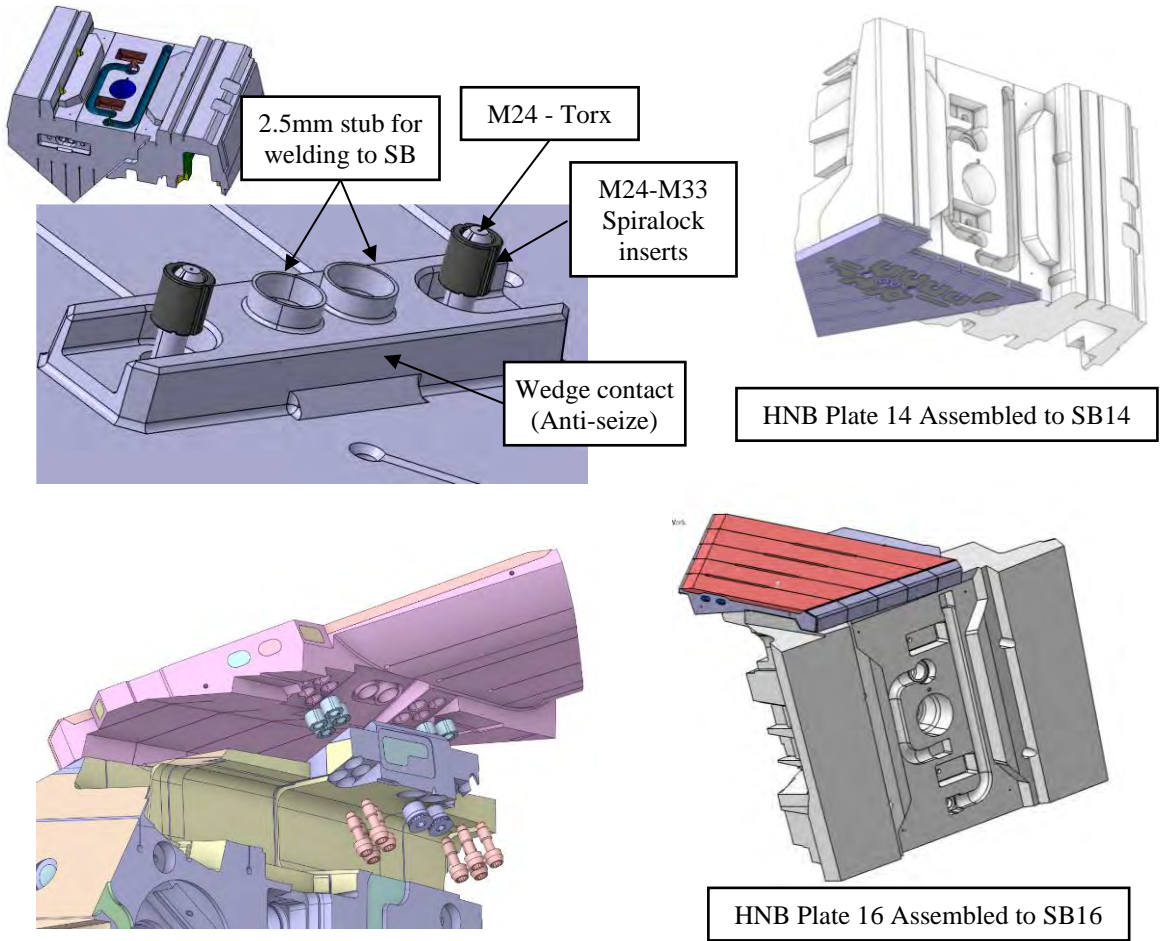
HNB Plates 14&16 assembled to corresponding SB (FII) via welding and bolting interface (for information only)
